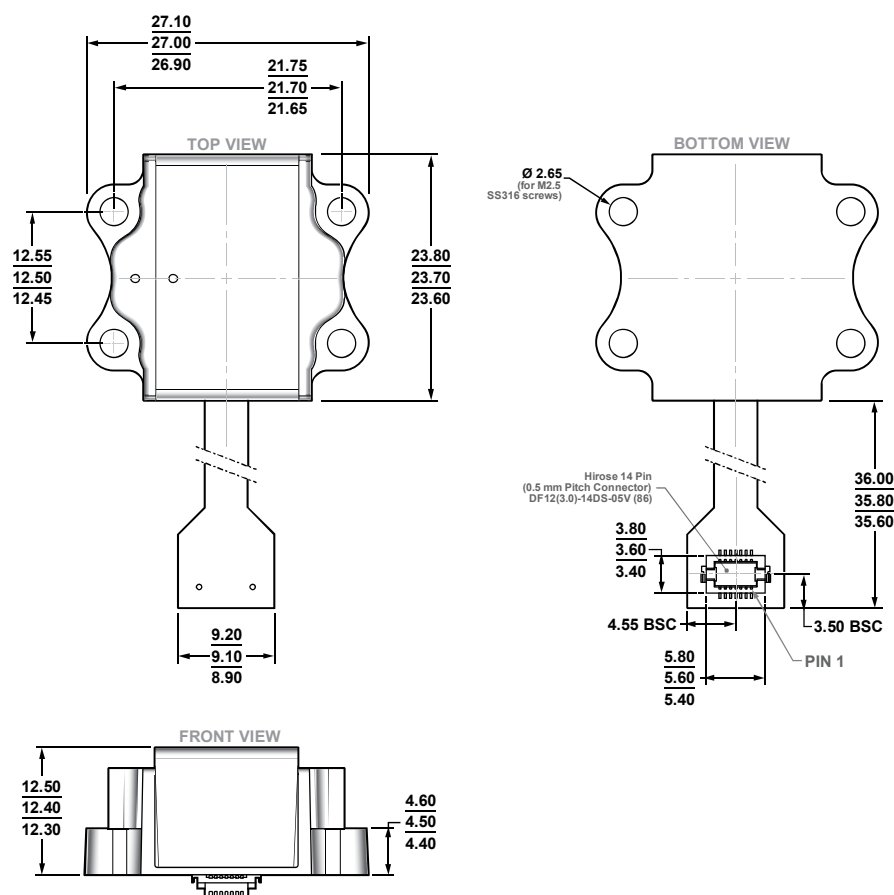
14-Lead Module with Integrated Flex Connector [MODULE]
